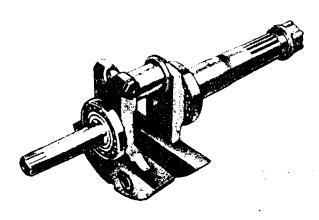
Crankshaft Assembly Part No. A5891 with Seventh Order Torsional Vibration Damper — Showing Front and Rear Main Bearings and Propeller Thread Protection Cup.
